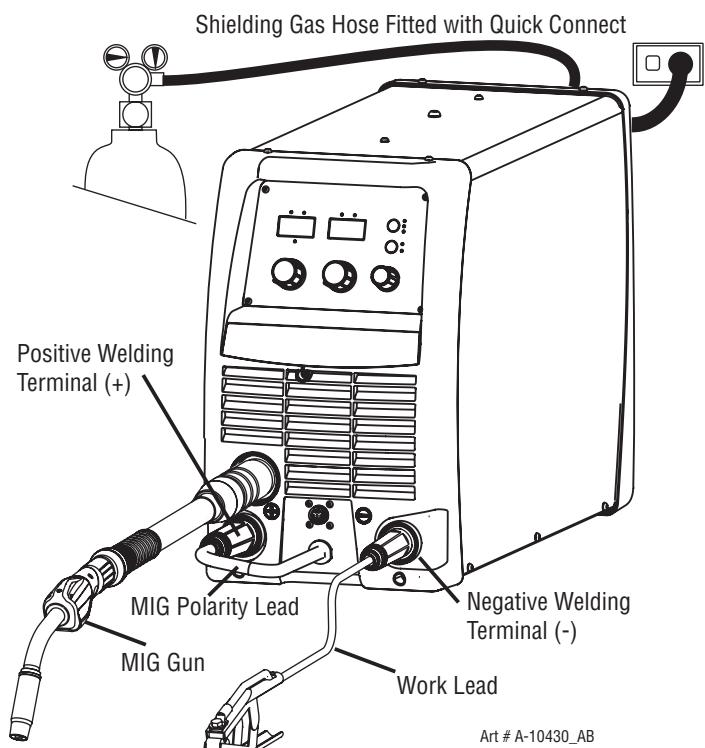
Setup for MIG Welding with Gas Shielded MIG Wire
